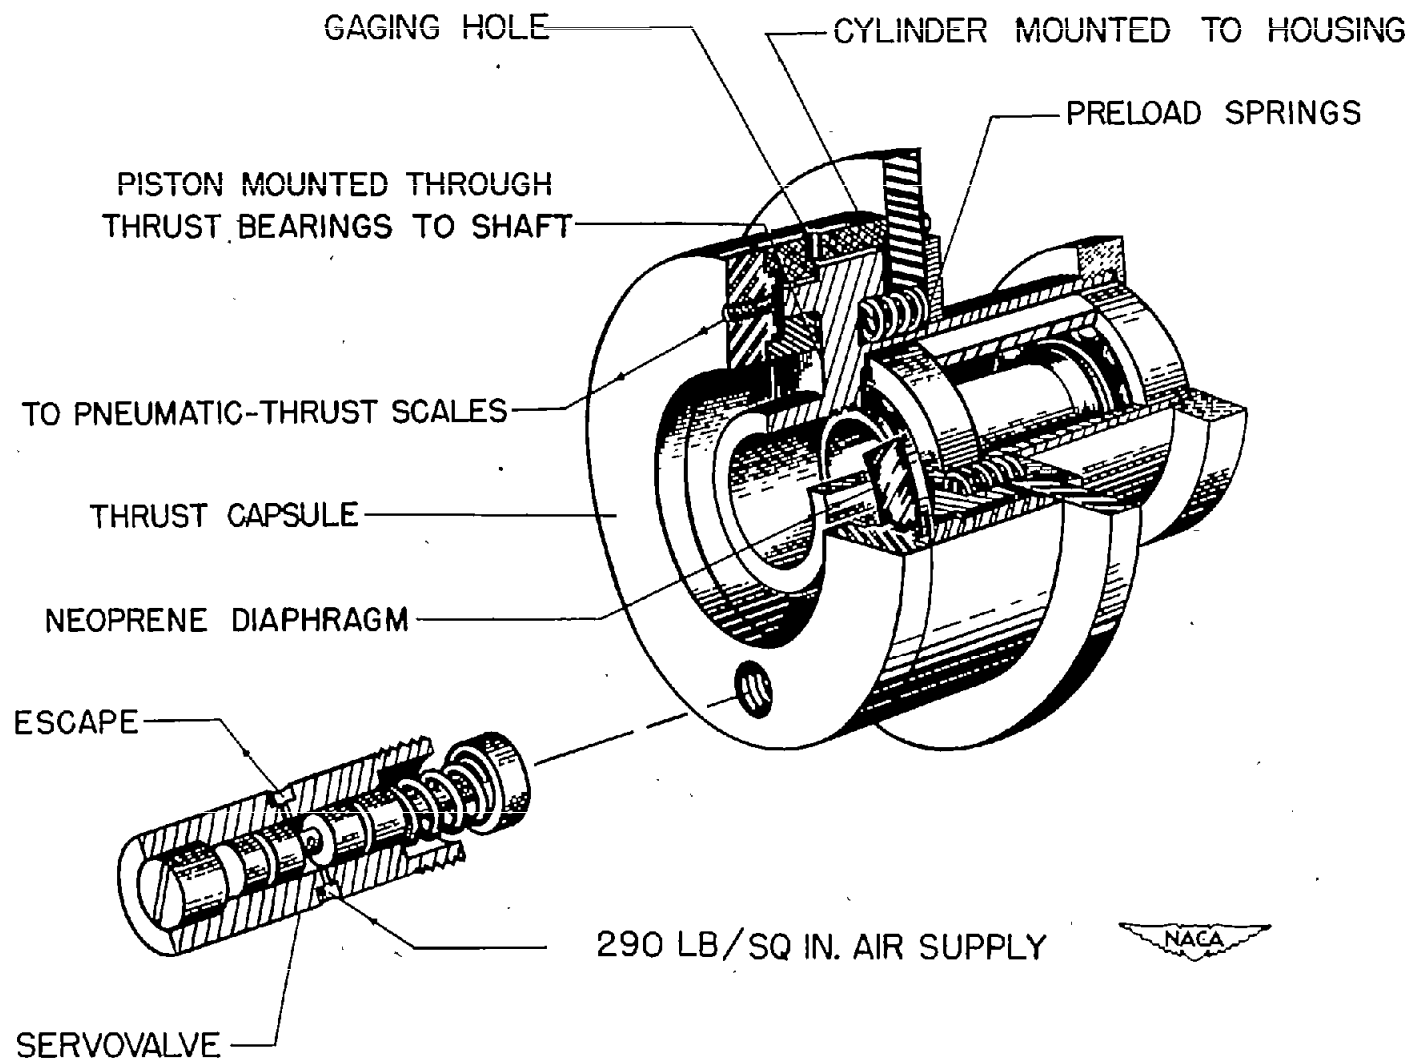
Cutaway view showing arrangement in thrust capsule and servovalve.
